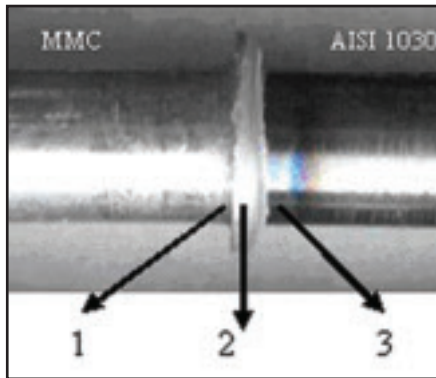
Macro picture of the sample with friction welding.
